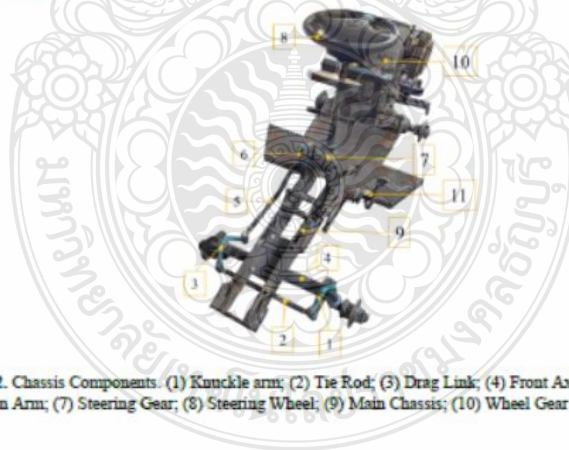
Chassis Components. (1) Knuckle arm; (2) Tie Rod; (3) Drag Link; (4) Front Axle; (5) Longitudinal Tie; (6) Pitman Arm; (7) Steering Gear; (8) Steering Wheel; (9) Main Chassis; (10) Wheel Gear Block; (11) Brake.
